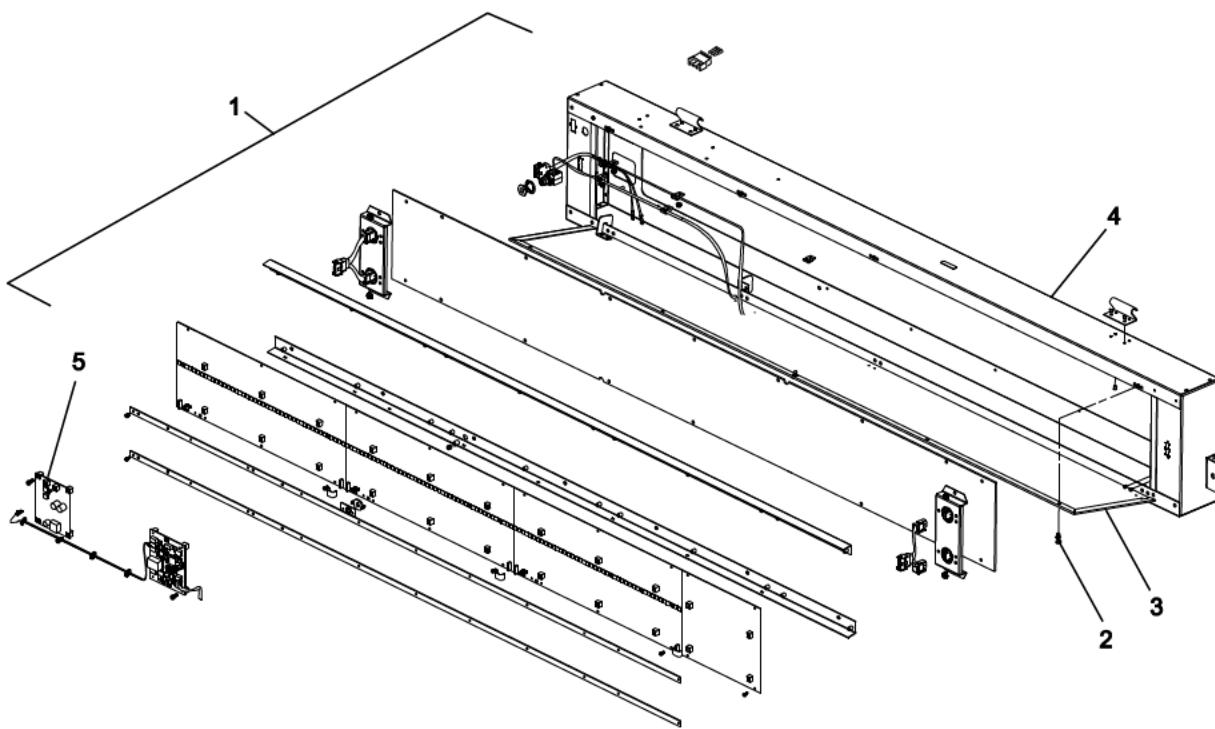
Replace Front Destination Sign Power Supply PCB
